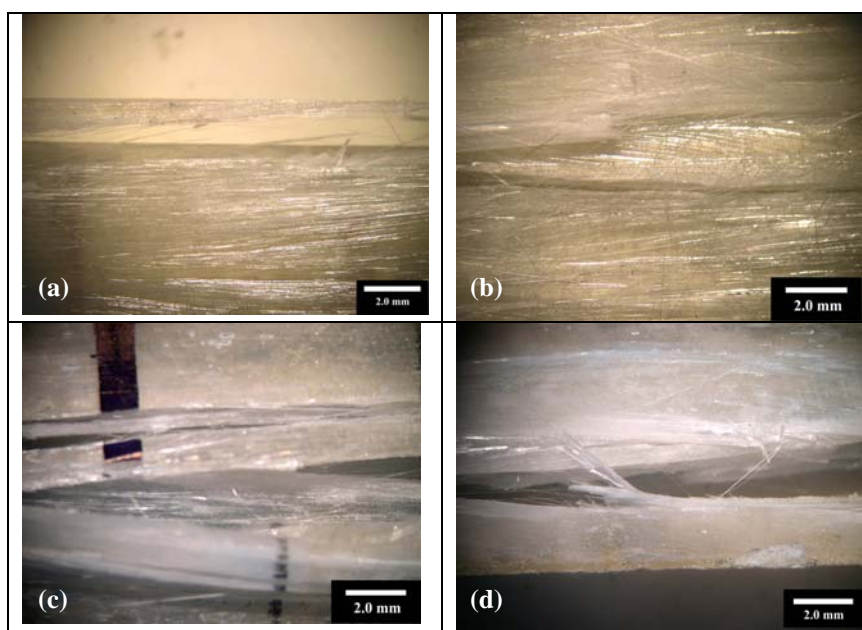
Fracture surface of longitudinal samples for: (a) and (b) unaged specimens; (c) and (d) aged specimens.
